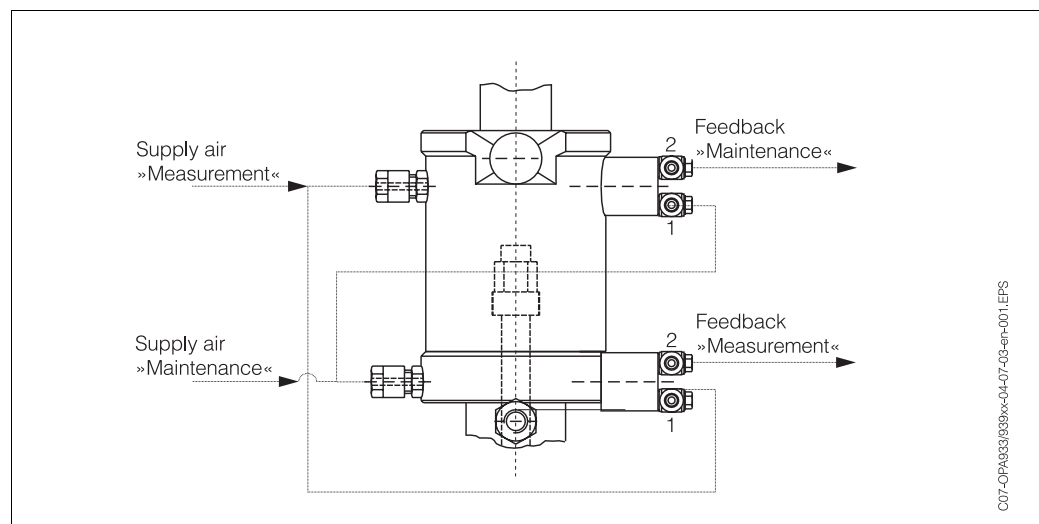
Connection of the pneumatic lines to the CleanStar OPA 933/939 assembly
